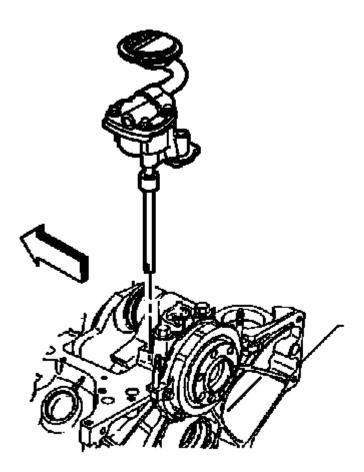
View Of Oil Pump Bolt Courtesy of GENERAL MOTORS CORP.
